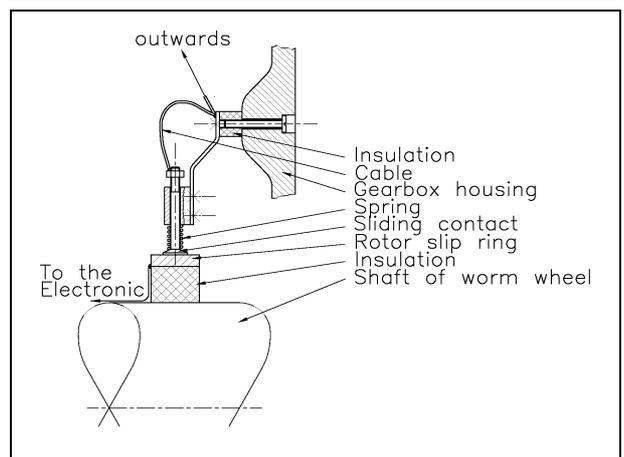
Improved arrangement of sliding contacts and rotor slip ring for signal transmission
